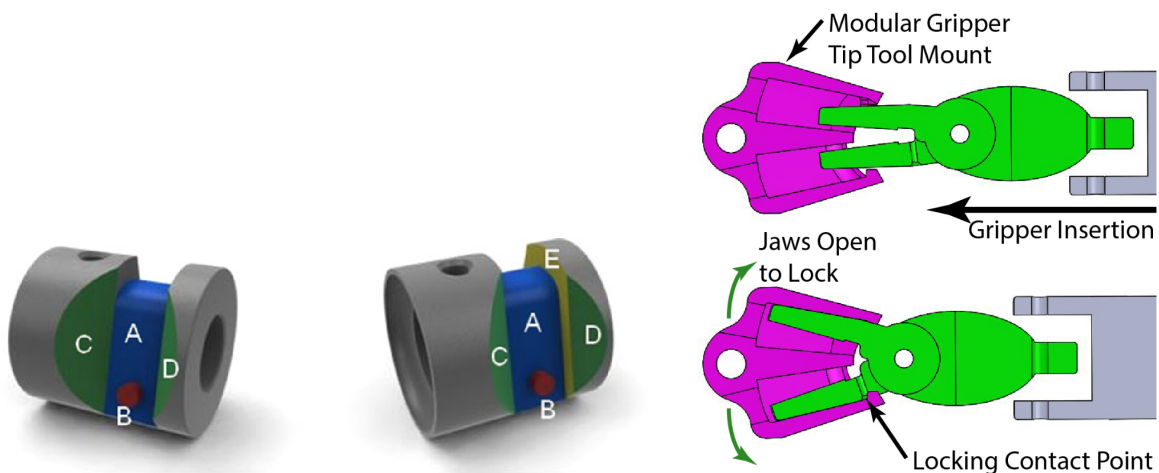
Left: Tool engagement mechanism for standard da Vinci ProGrasp Tool. Image and concept from [7]. Right: Tool engagement mechanism for standard da Vinci Large Needle Driver. Image and concept from [8]
